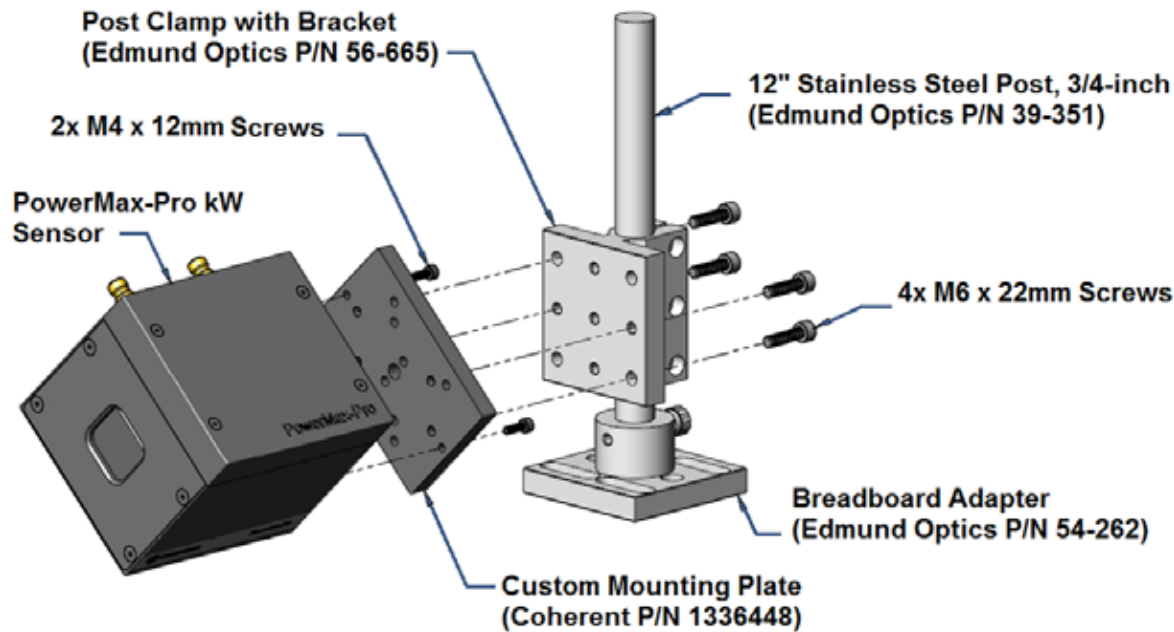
Parts Breakout — Rotated Sensor Assembly
